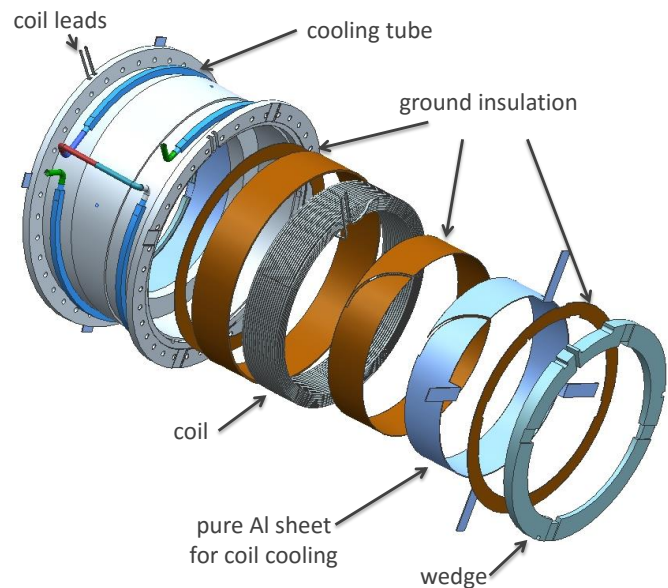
Exploded view of a typical TS coil module, containing two superconducting coils. The different components associated with a single coil are shown. The cooling is indirect: LHe flows in pipes welded onto the shell.
